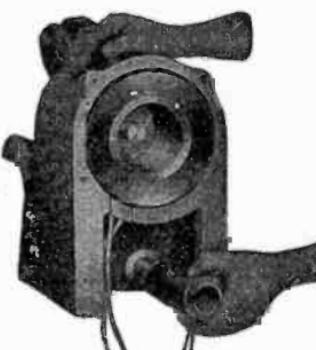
,169.—*How to assemble an air circuit breaker 18.* Inserting the trip coil in the solenoid magnet frame.
